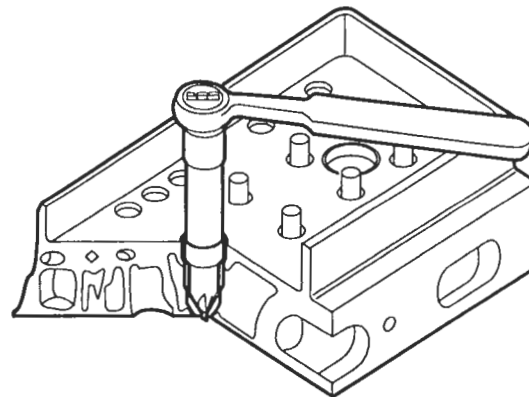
Reaming Injector Tube for Injector Nut with Tool J 5286-9
